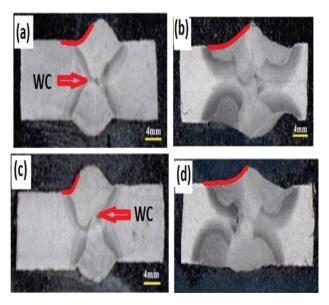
Macrograph of weld joints: a) AW, b) AWT, c) FW, d) FWT
